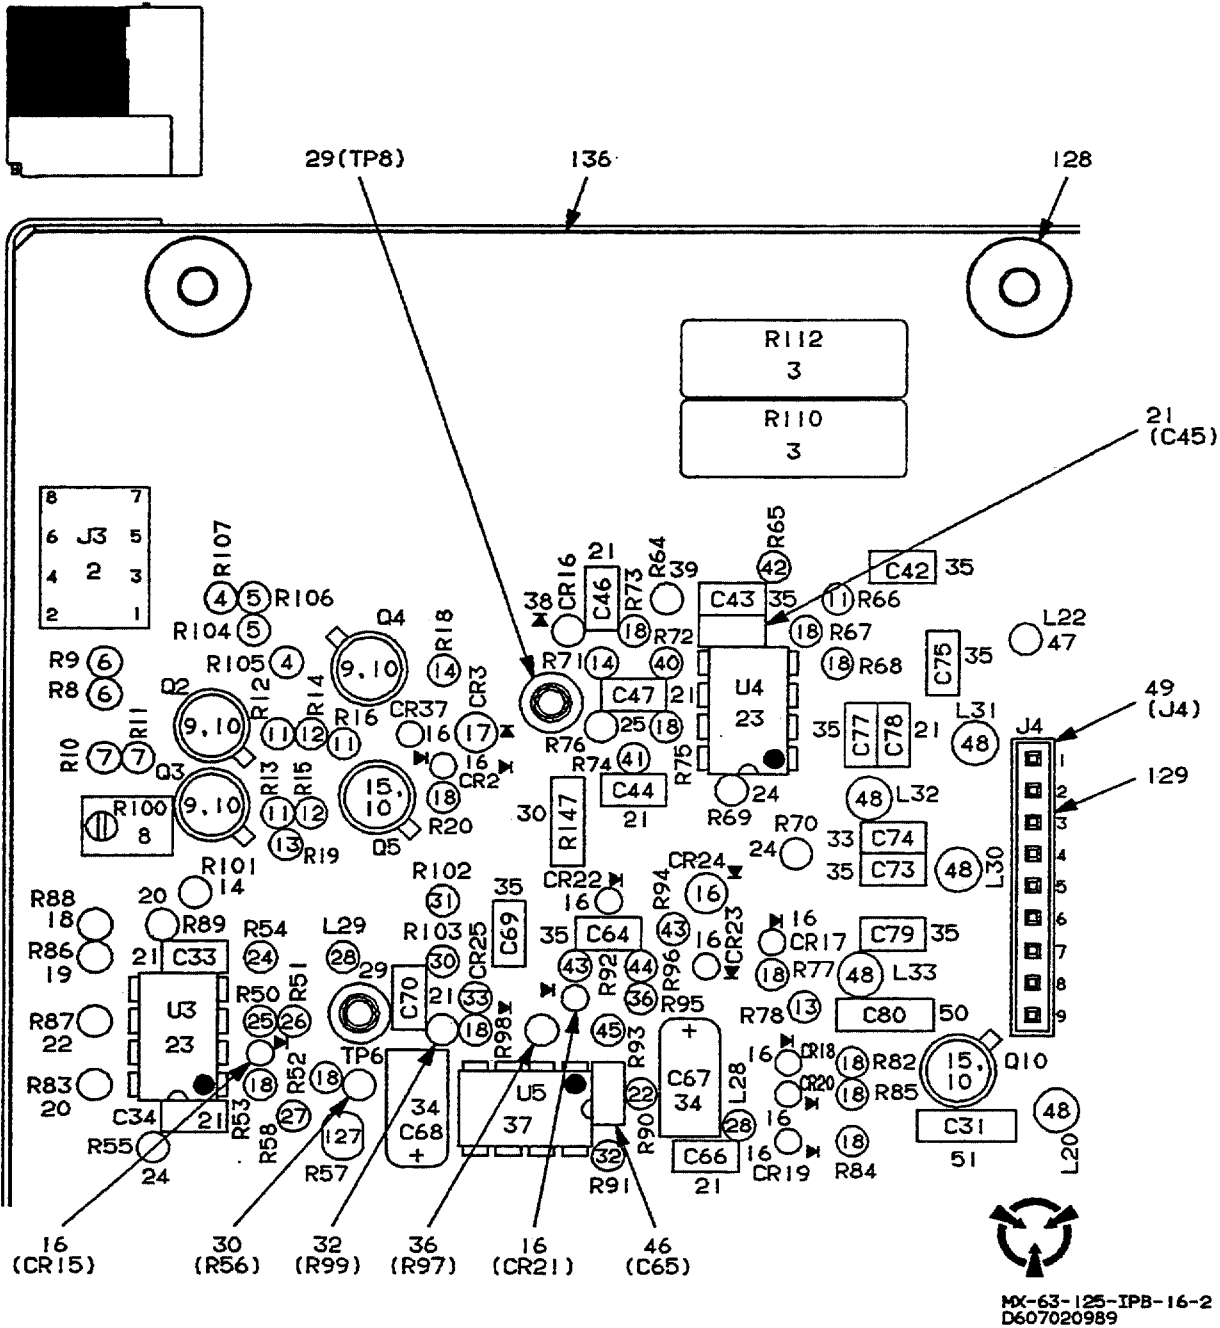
High Band Amplifier Module Assembly (Sheet 2 of 4)
